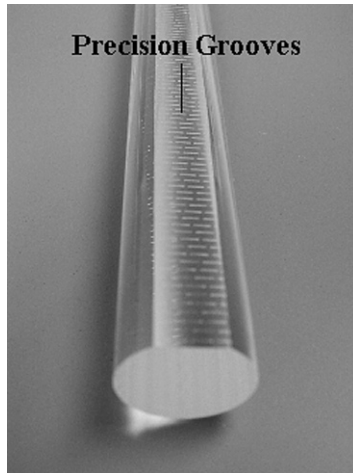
Closeup of side-emitting rod showing light-scattering grooves
